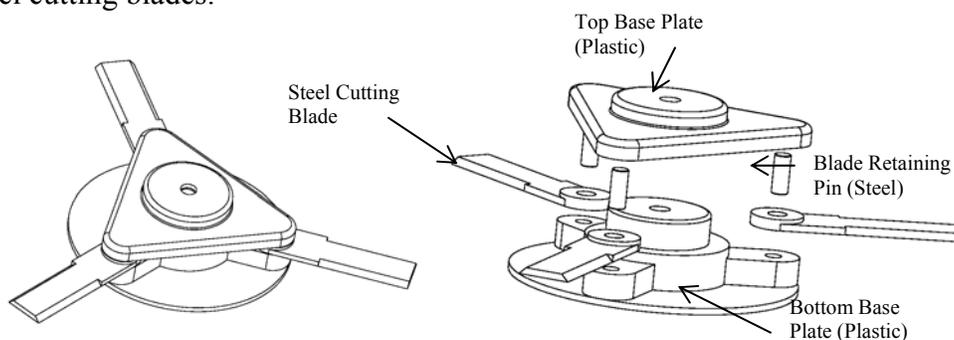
Weed Wizard Rotational Cutting Head
